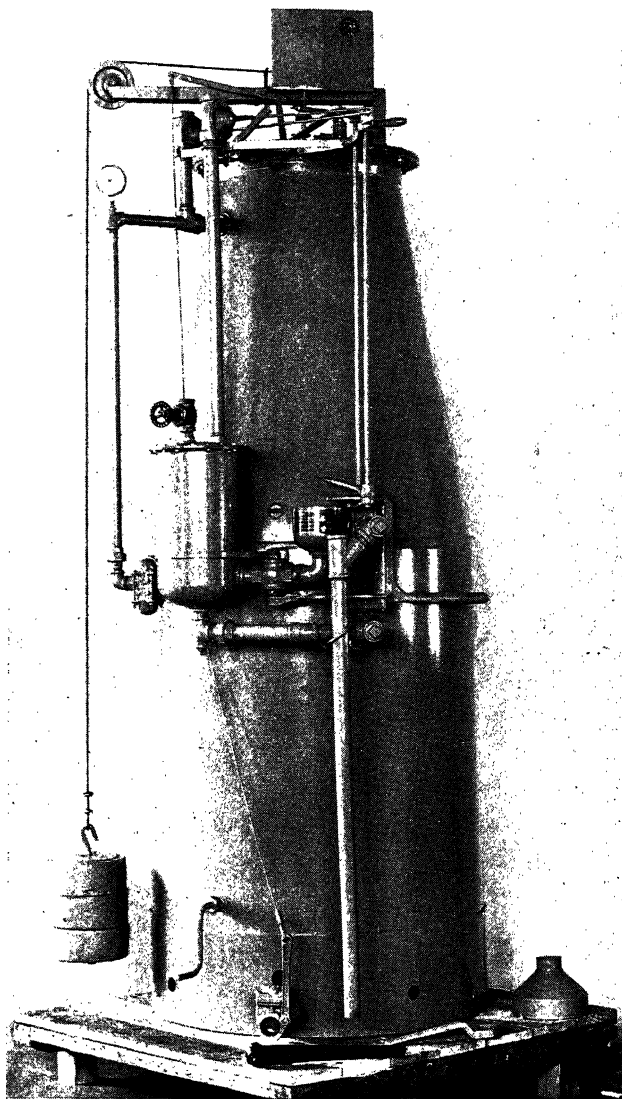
Carbide generator, stationary type. (*Courtesy of Air Reduction Sales Co.*)
